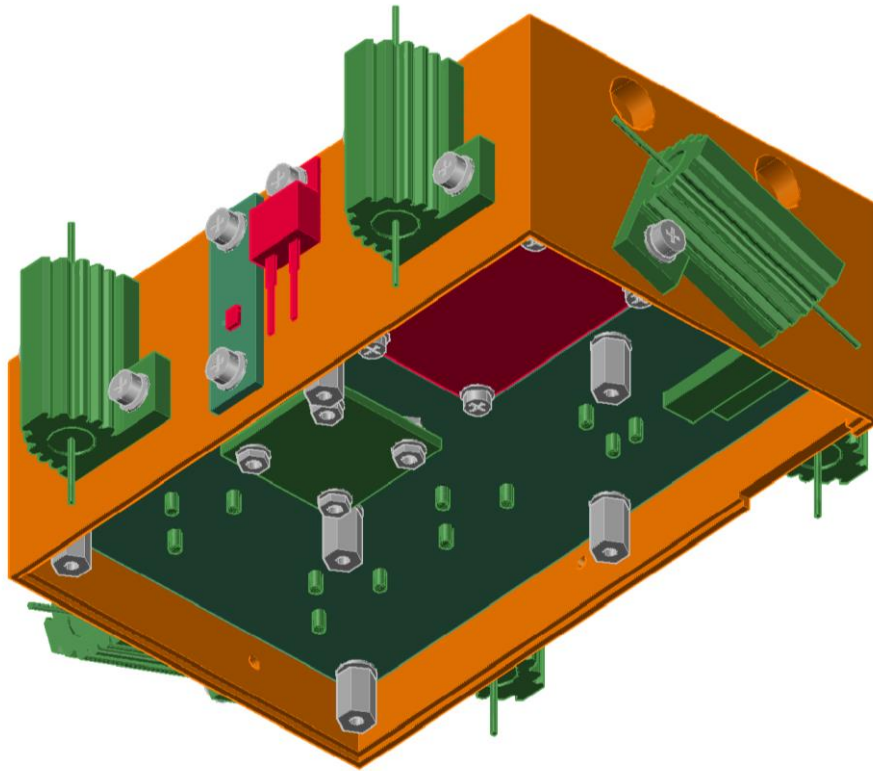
Rendered bottom 3D view of the manifold with all the internal and external components mounted. Only the bottom cover has been removed.
